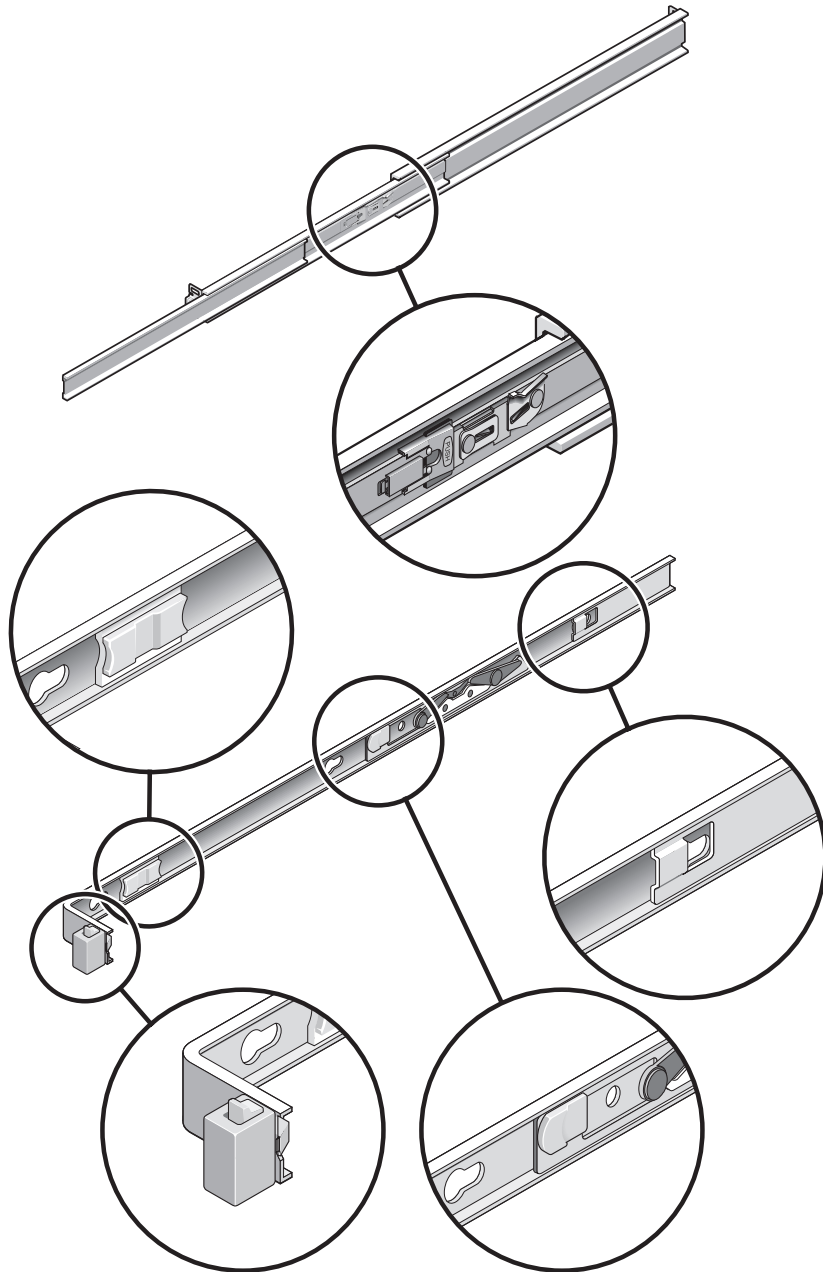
Locating the Locks on the Slide Rail Assembly
